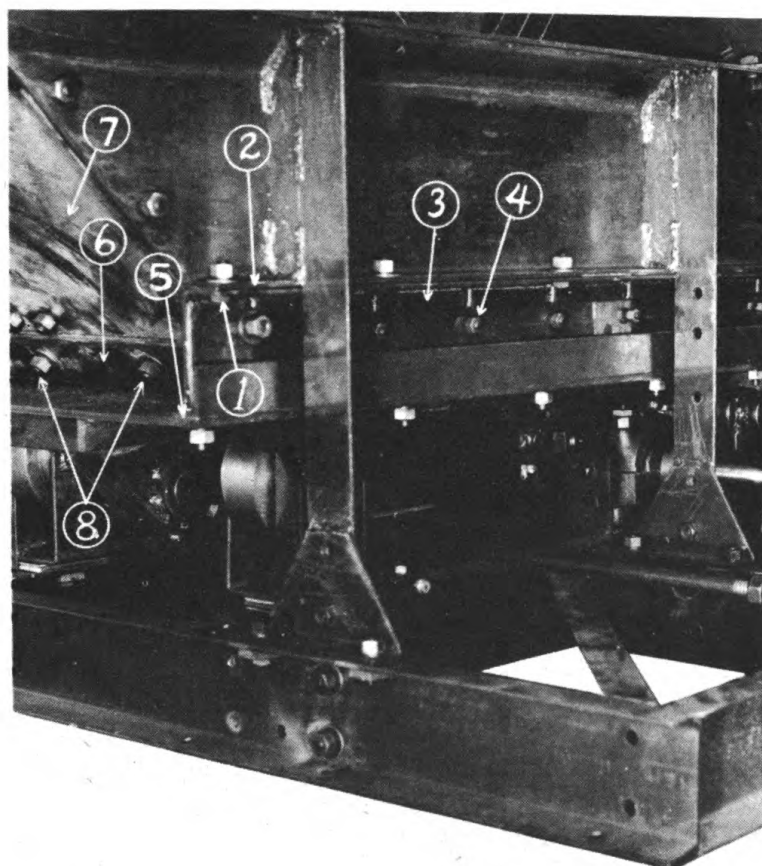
DRIVING SIDE OF RECIPROCATING FEEDER.
